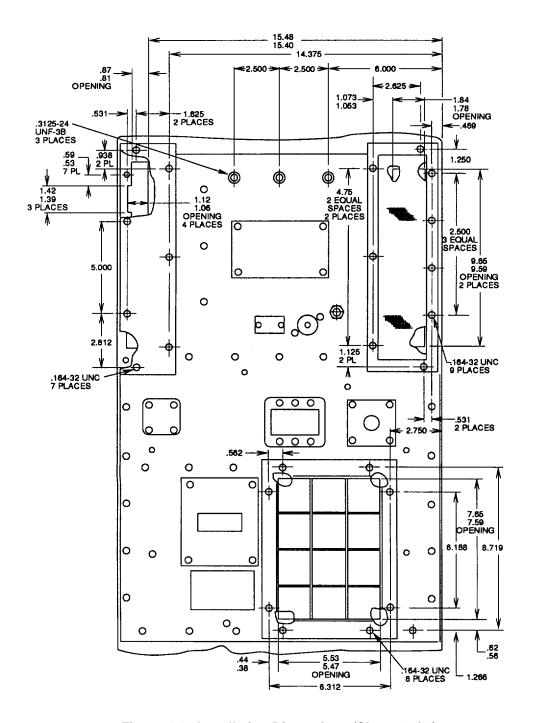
Installation Dimensions (Sheet 3 of 6)
